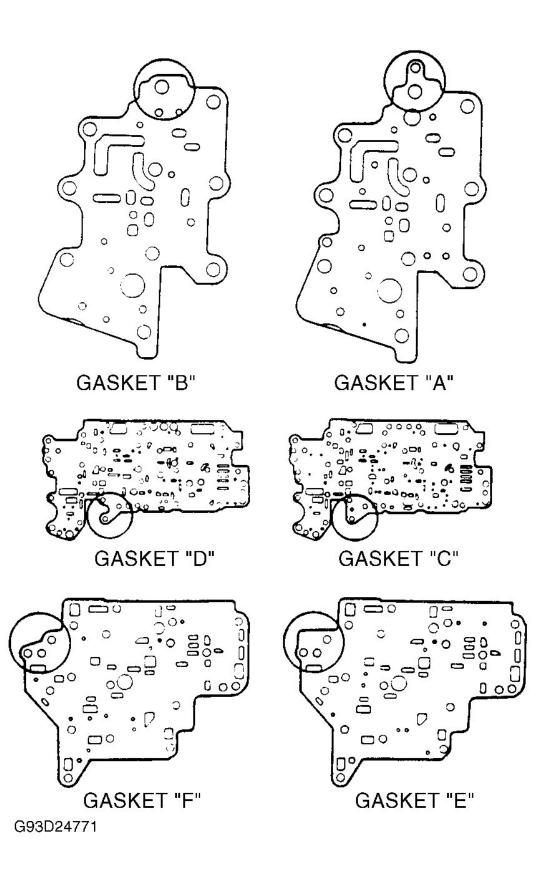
Identifying Valve Body Gaskets (FA4A-EL) Courtesy of MAZDA MOTORS CORP.
